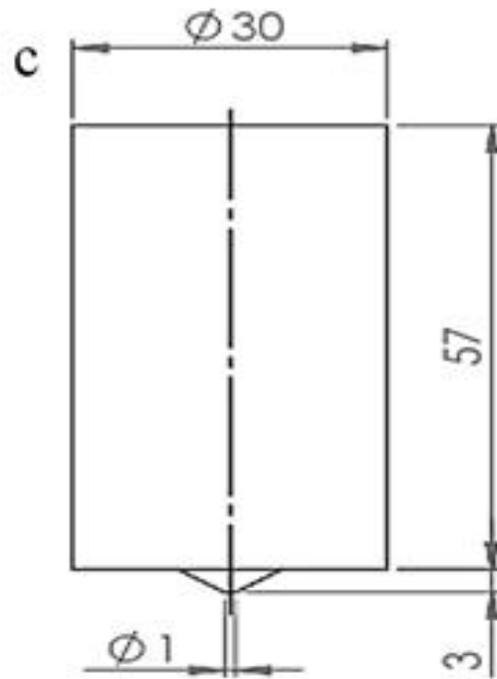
The UWFSW technique produces a welded pipe.
